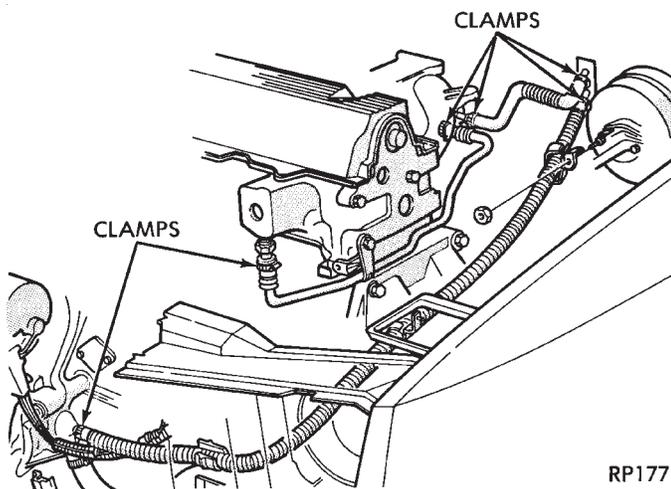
Heater Hose Routing—2.2 L, 2.5 L Engines—Typical
